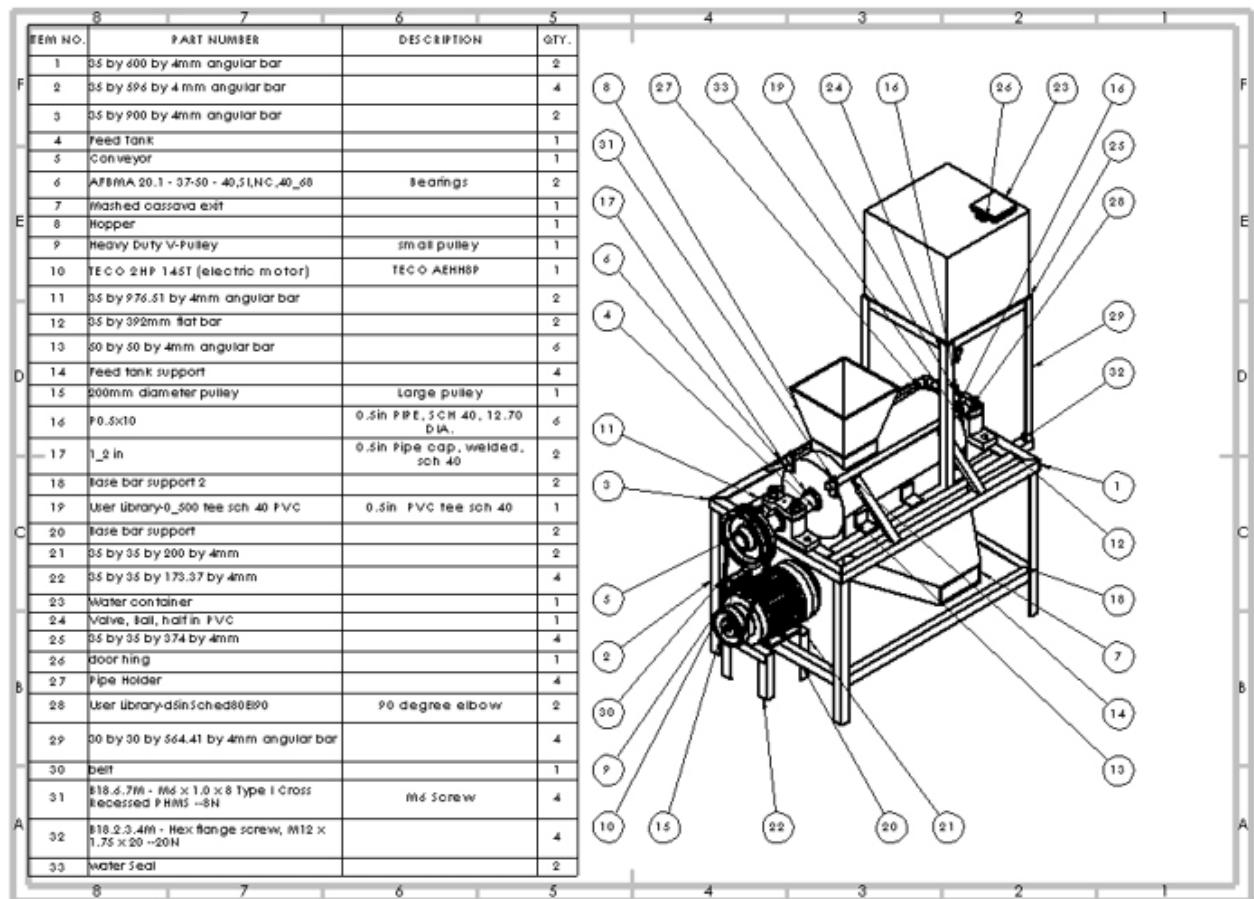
Designed Drawing of the Fermented Cassava Mashing/Sieving Equipment showing its parts
